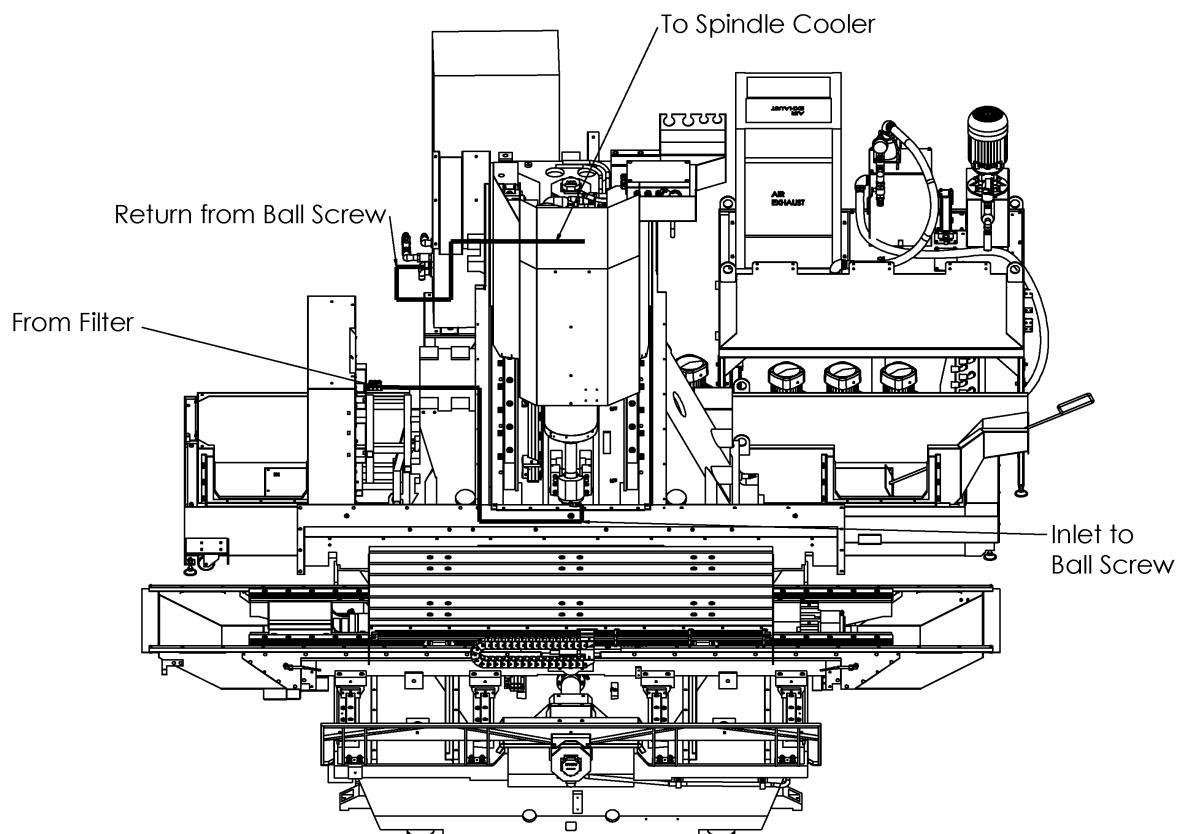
Piping Route to Z-Axis Ball Screw Core Cooling
